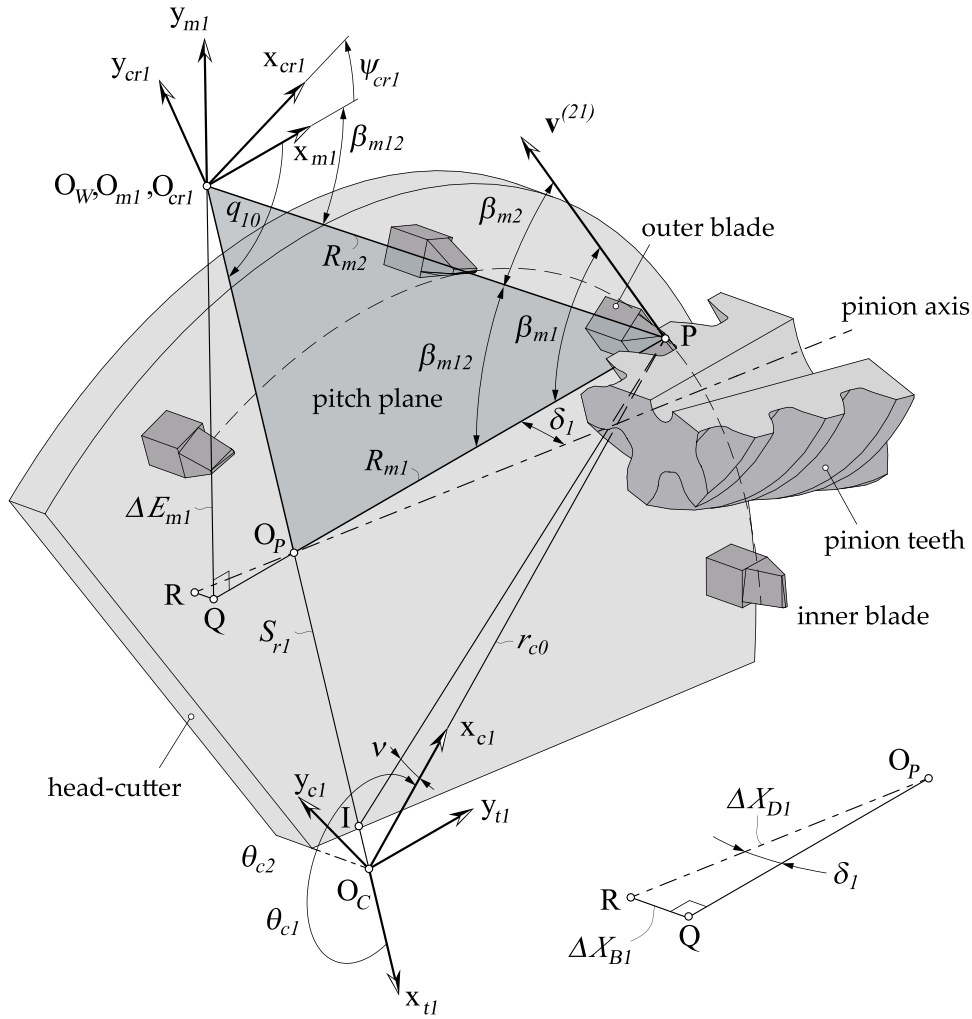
For illustration of the basic machine-tool settings of the pinion.
